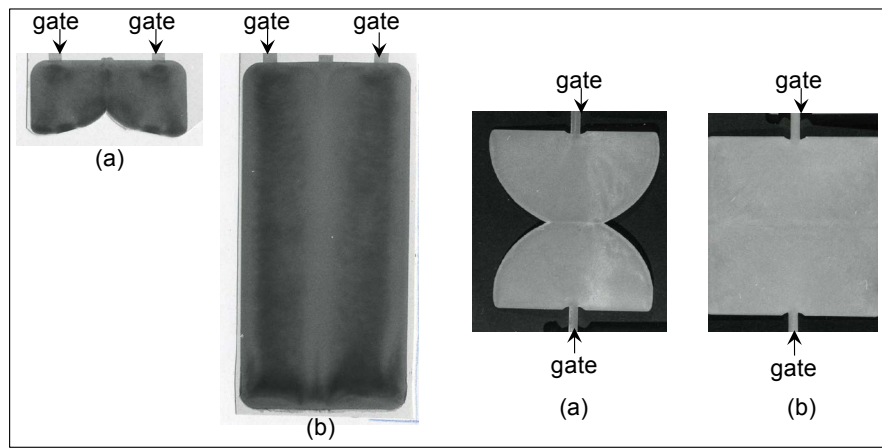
Generation of weld lines: (a) short shots and (b) complete mouldings (from Akay (1993))
